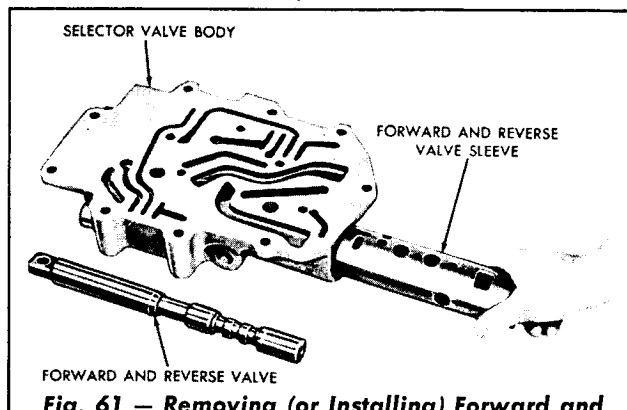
Removing (or Installing) Forward and Reverse Valve Sleeve
